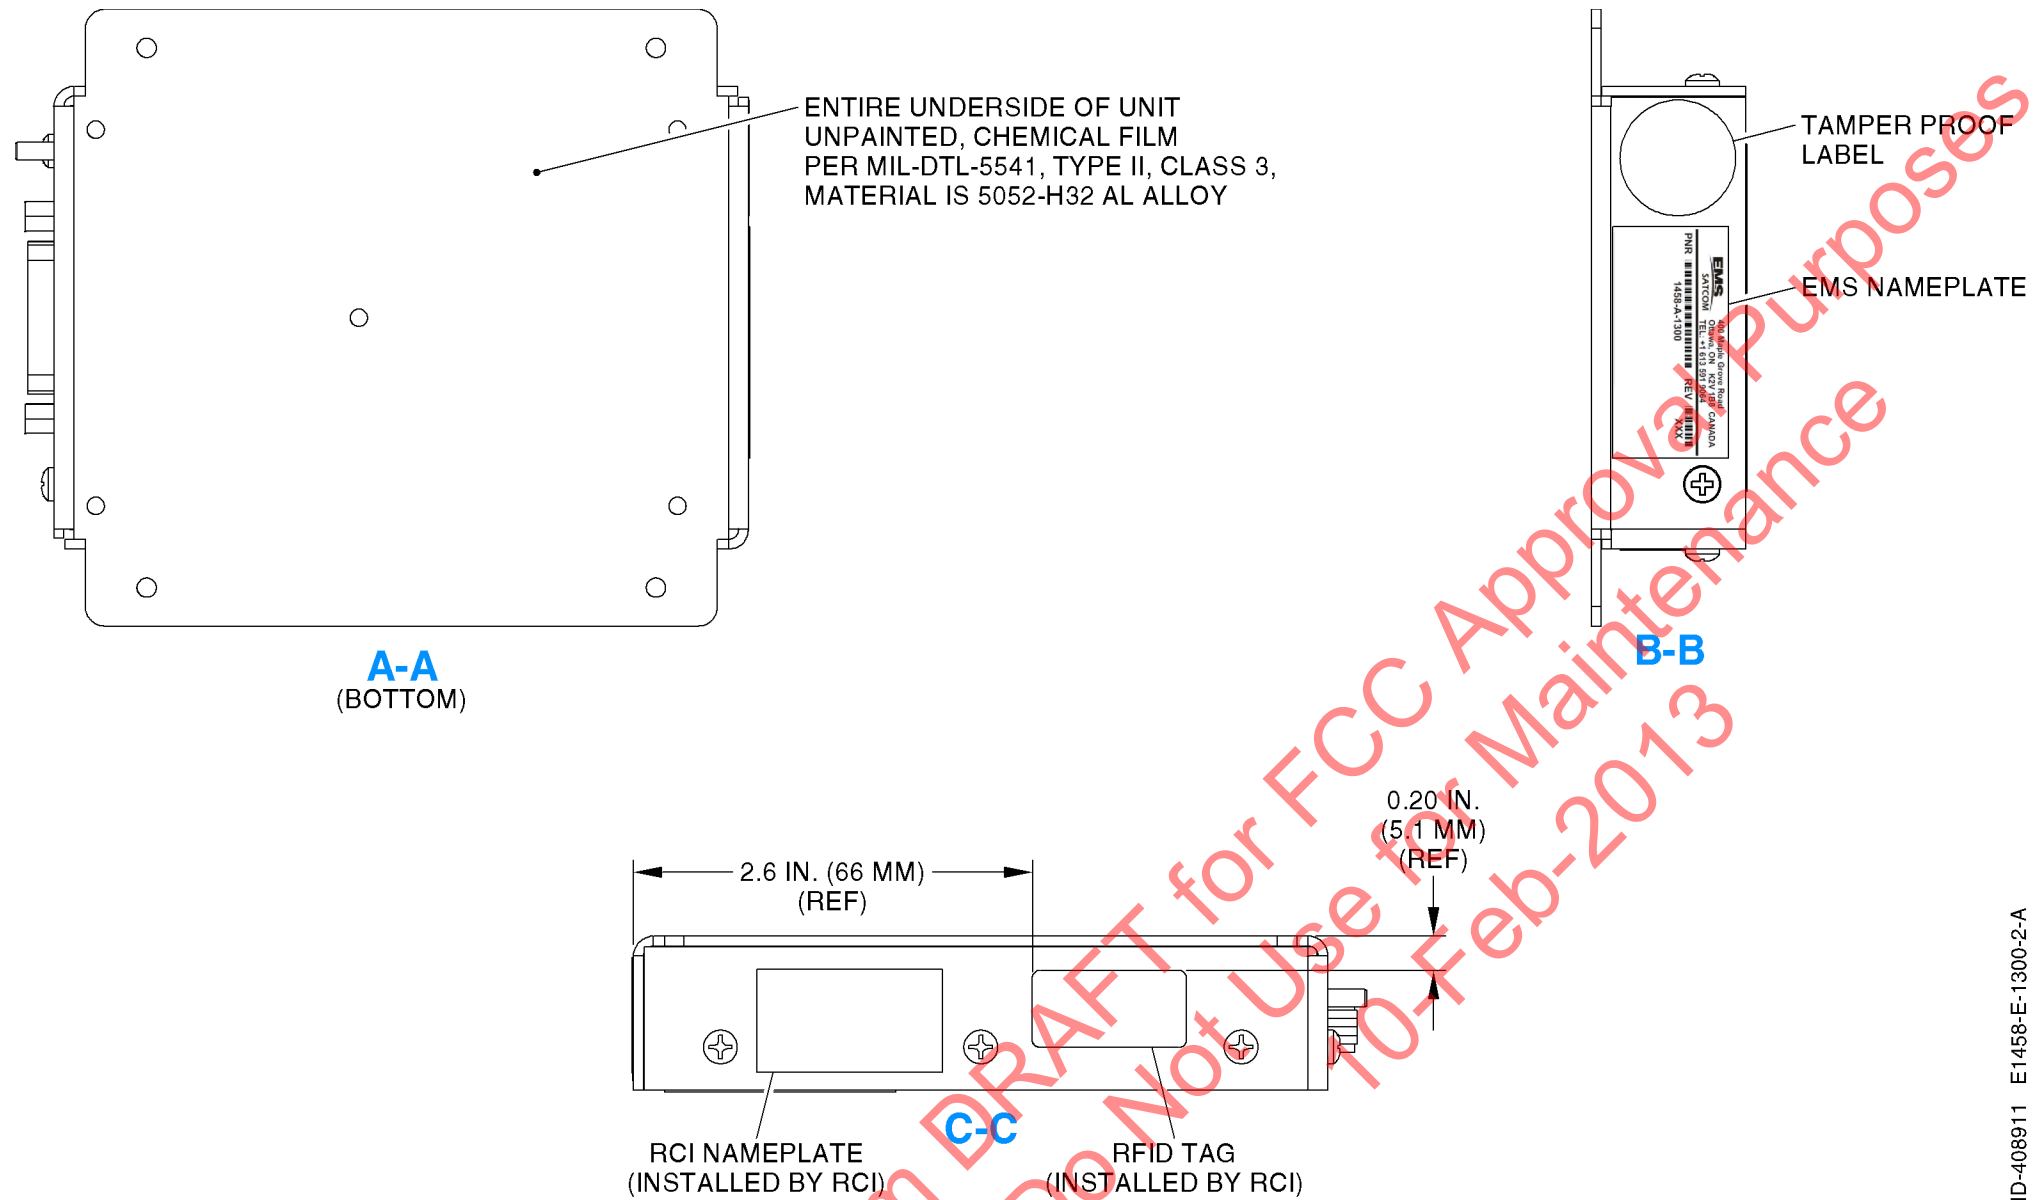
(Sheet 2 of 2) SCM Outline and Installation Drawing (GRAPHIC 23-15-30-99B-806-A01)
